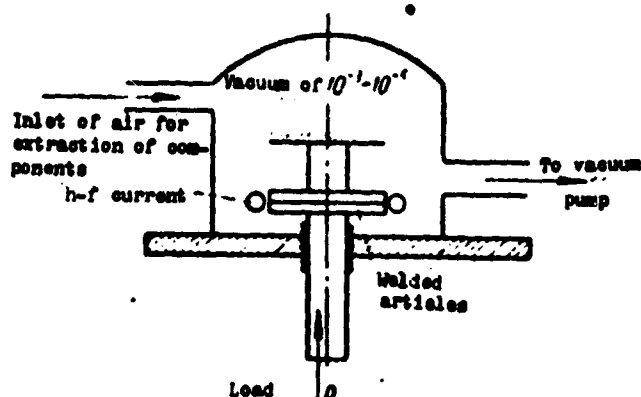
Scheme of diffusion-vacuum welding.
